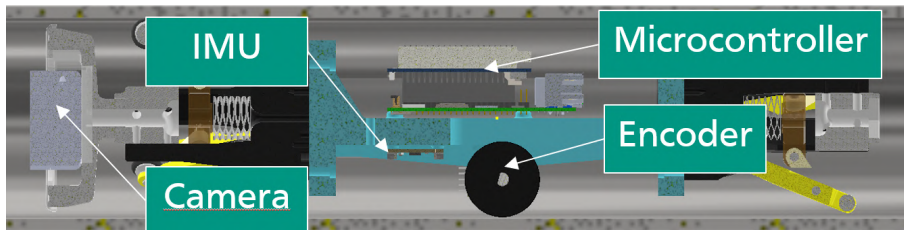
The in-line deployed six-legged crawler robotic platform equipped with the Intel RealSense D405 RGB-D camera.
